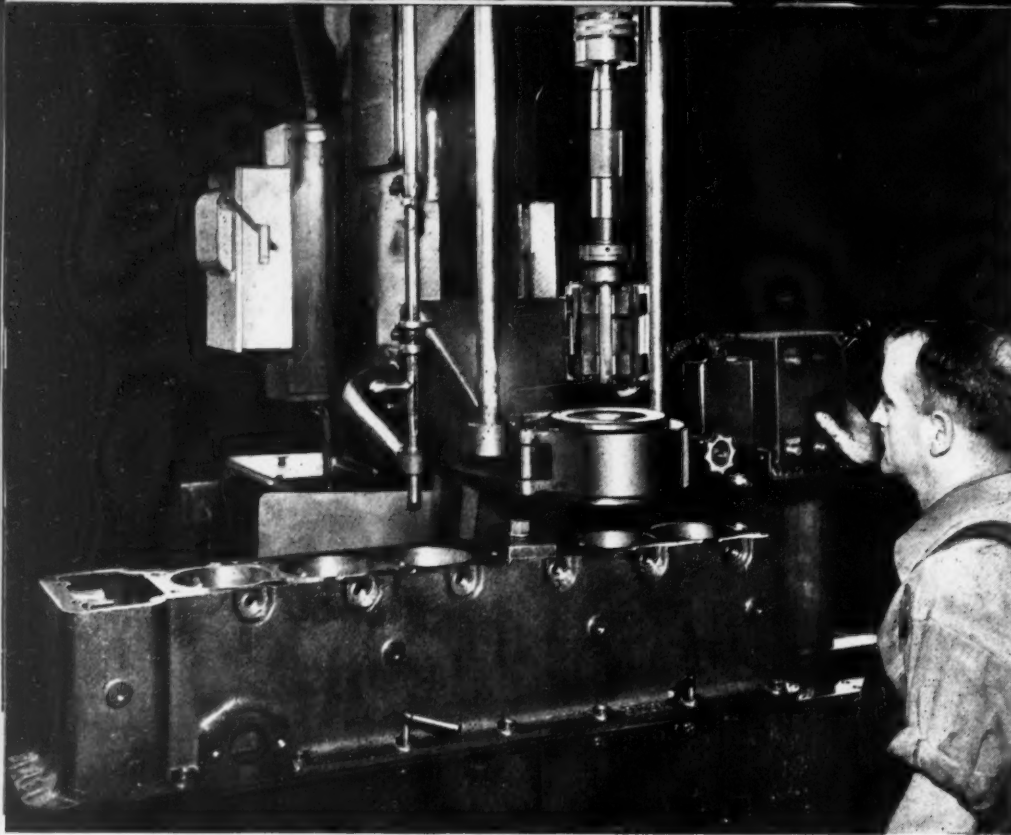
All Cylinder Bores are Honed to a High Finish by Single-spindle. Hydraulically Operated Machines of the Type Here Shown
